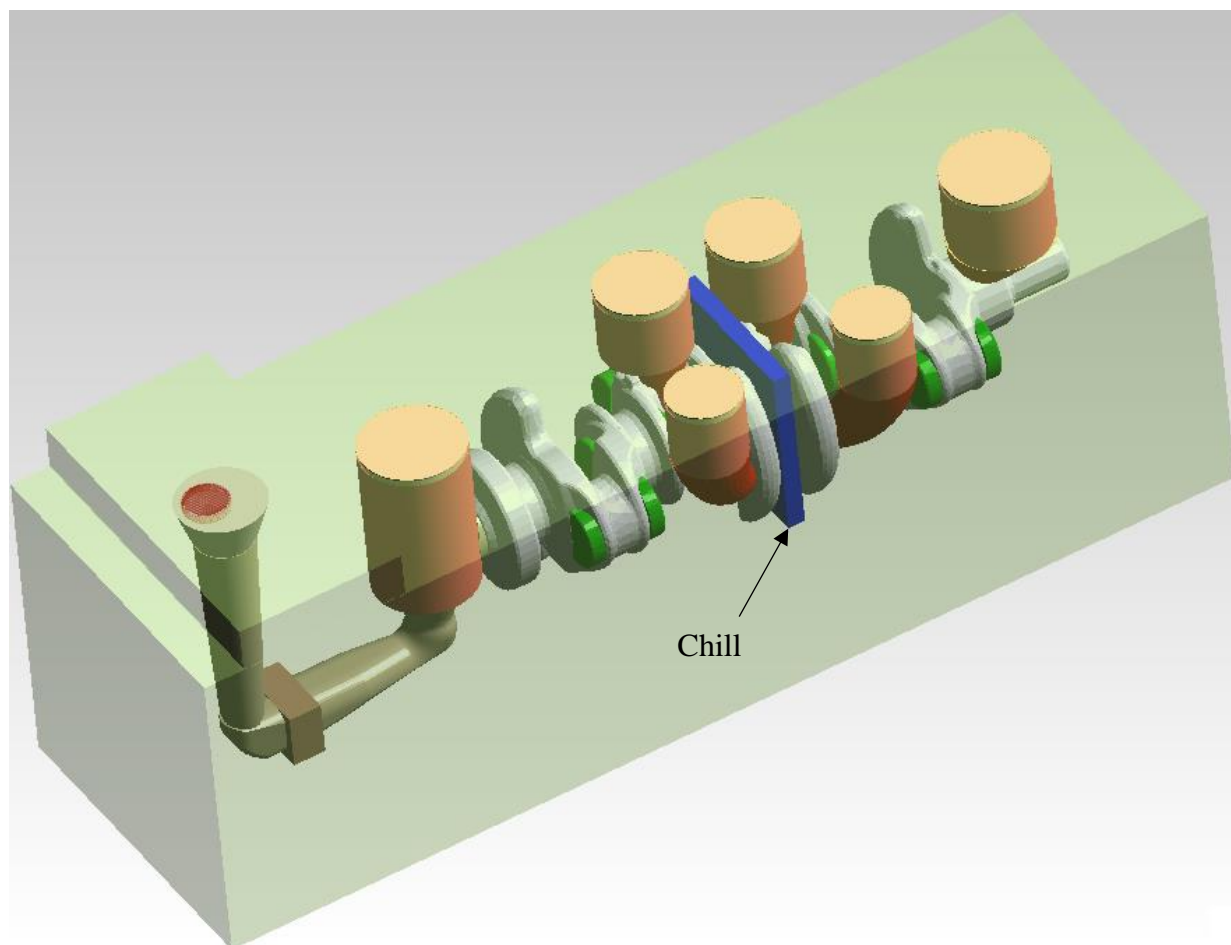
Completed gating and risering system for GM SGE crankshaft.
